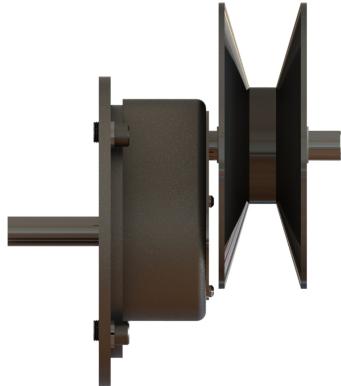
SolidWorks rendering of the Gearbox and Pulley Assembly
